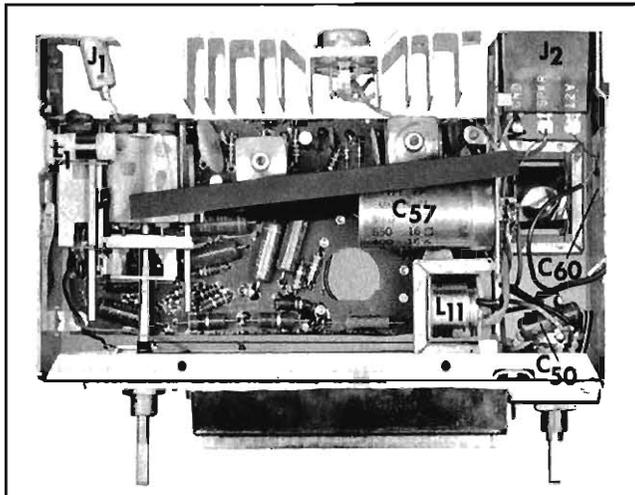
CHEVELLE PARTS LAYOUT TUNER VIEW - 985773 - RADIO
